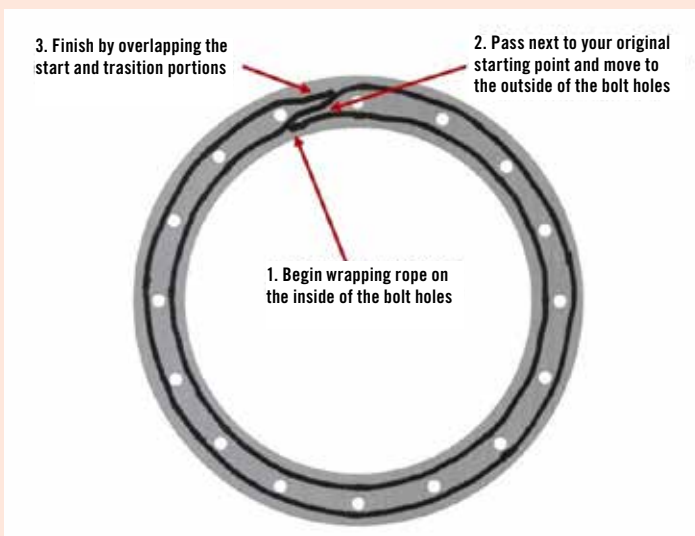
Best practice for wrapping a gasket for a bolt-on flange connection.
